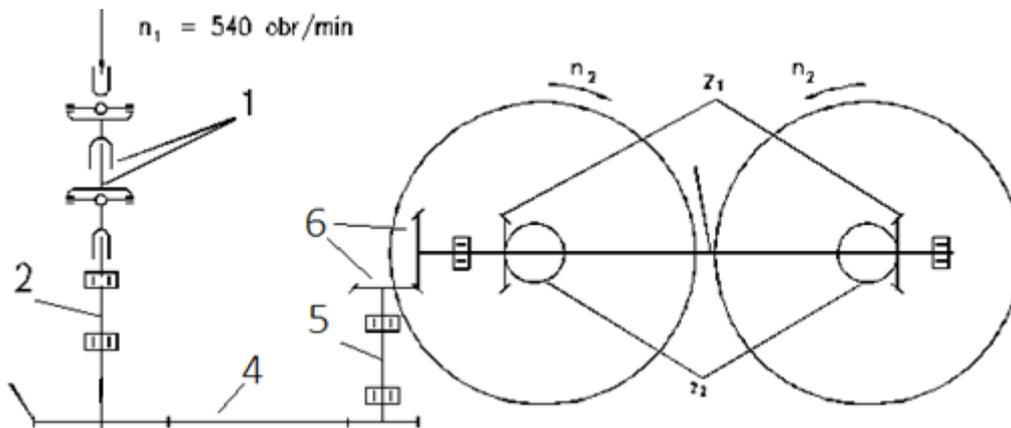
Eco CUT 210 drive system diagram: 1 – articulated telescopic shaft with one-way clutch; 2 – drive head shaft; 4 – V-belt transmission; 5 – main frame shaft; 6 – bevel gear; n_1 – rotational speed of tractors PTO; n_2 – rotational speed of drums (values given in Table 2); z_1 – large bevel gear; z_2 – small bevel gear.
